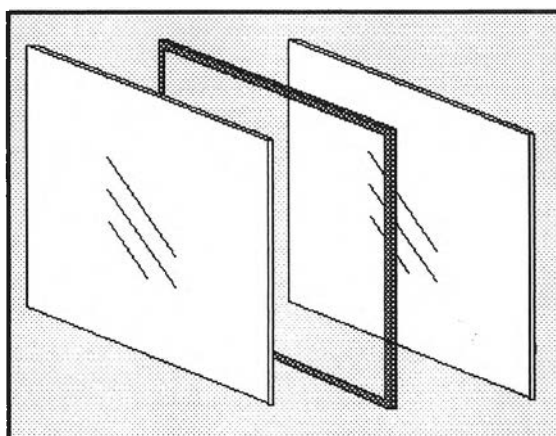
Assembly of molds and a PVC gasket before clamping.
